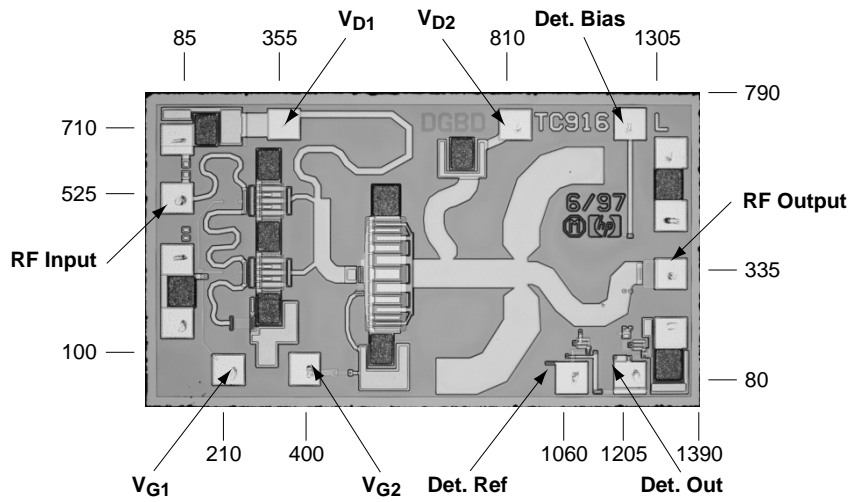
HMMC-5032 Bonding Pad Locations. (Dimensions are in micrometers)
